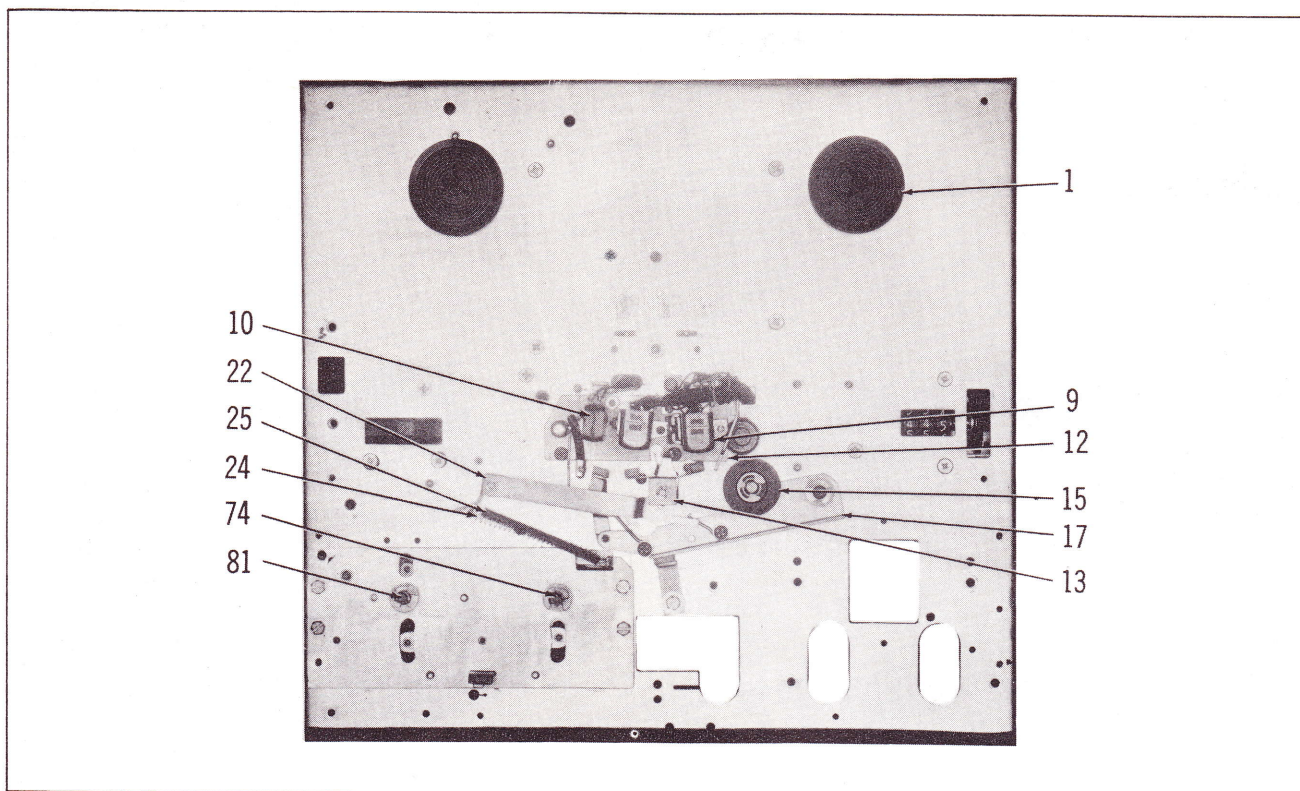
TOP VIEW OF MECHANISM WITH TOP COVERS REMOVED
